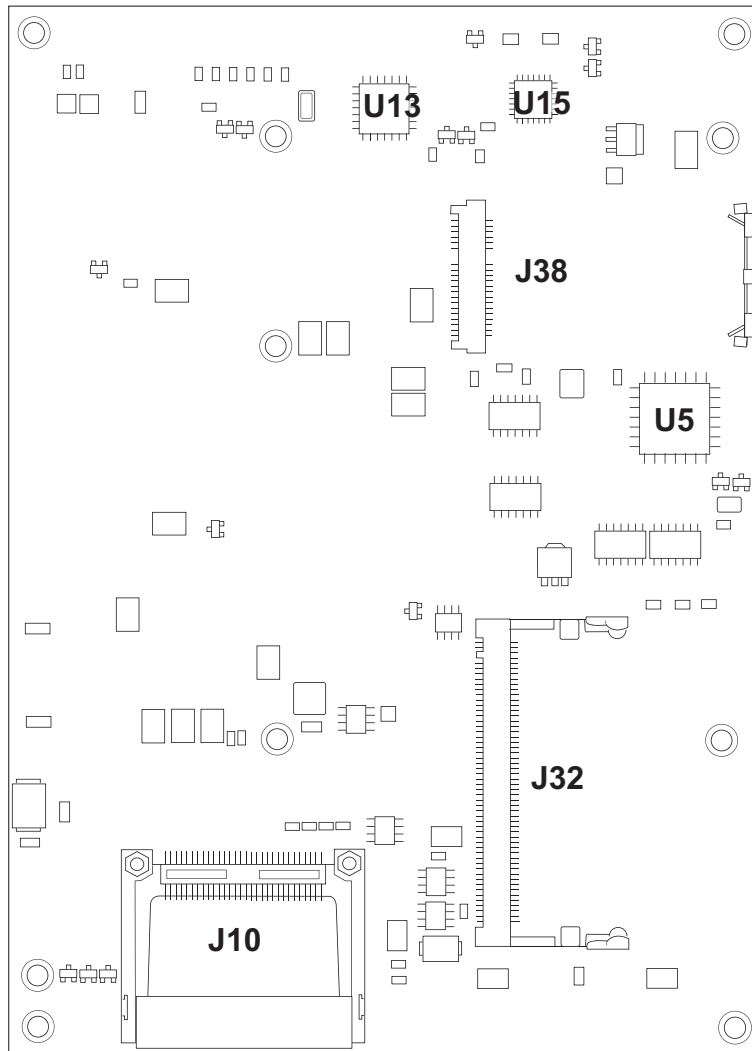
Additional Connector and Component Locations (Bottom view)
